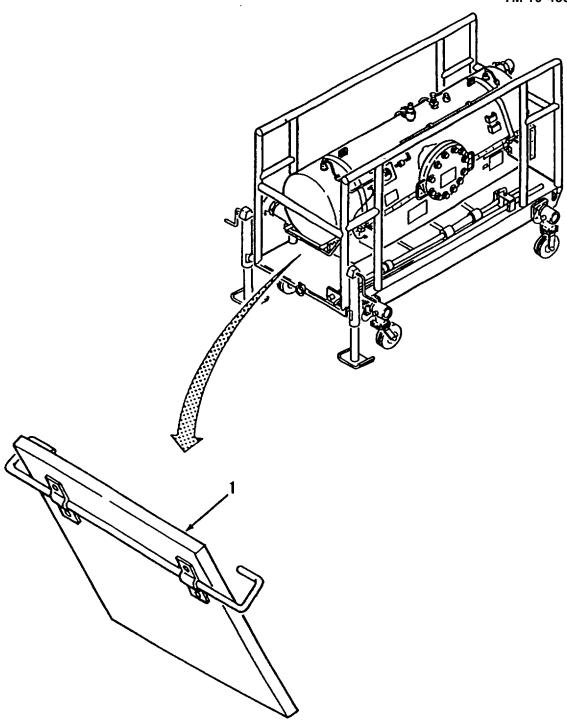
Door Assembly, Arctic Defrost (C-7 Blank)/C-8
